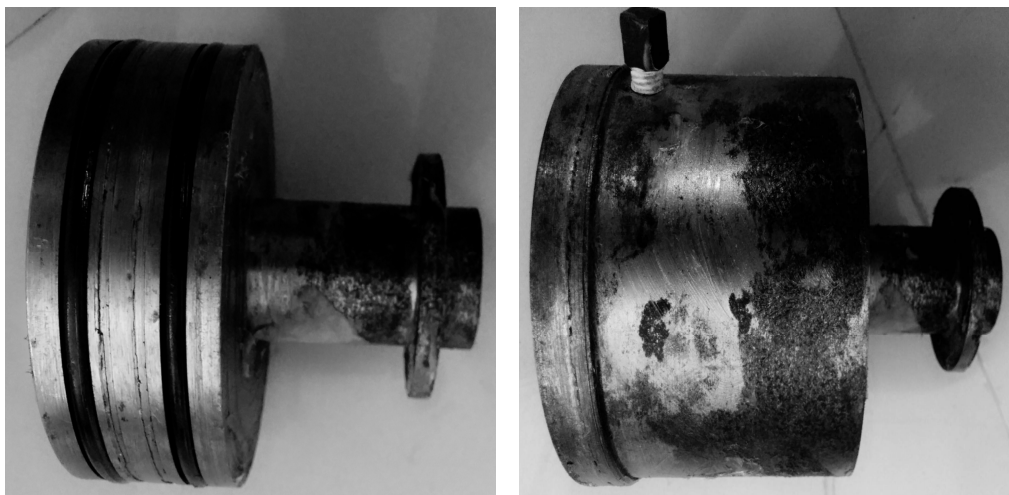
Actuator housing with coaxial coils, end plunger and Belleville springs.
